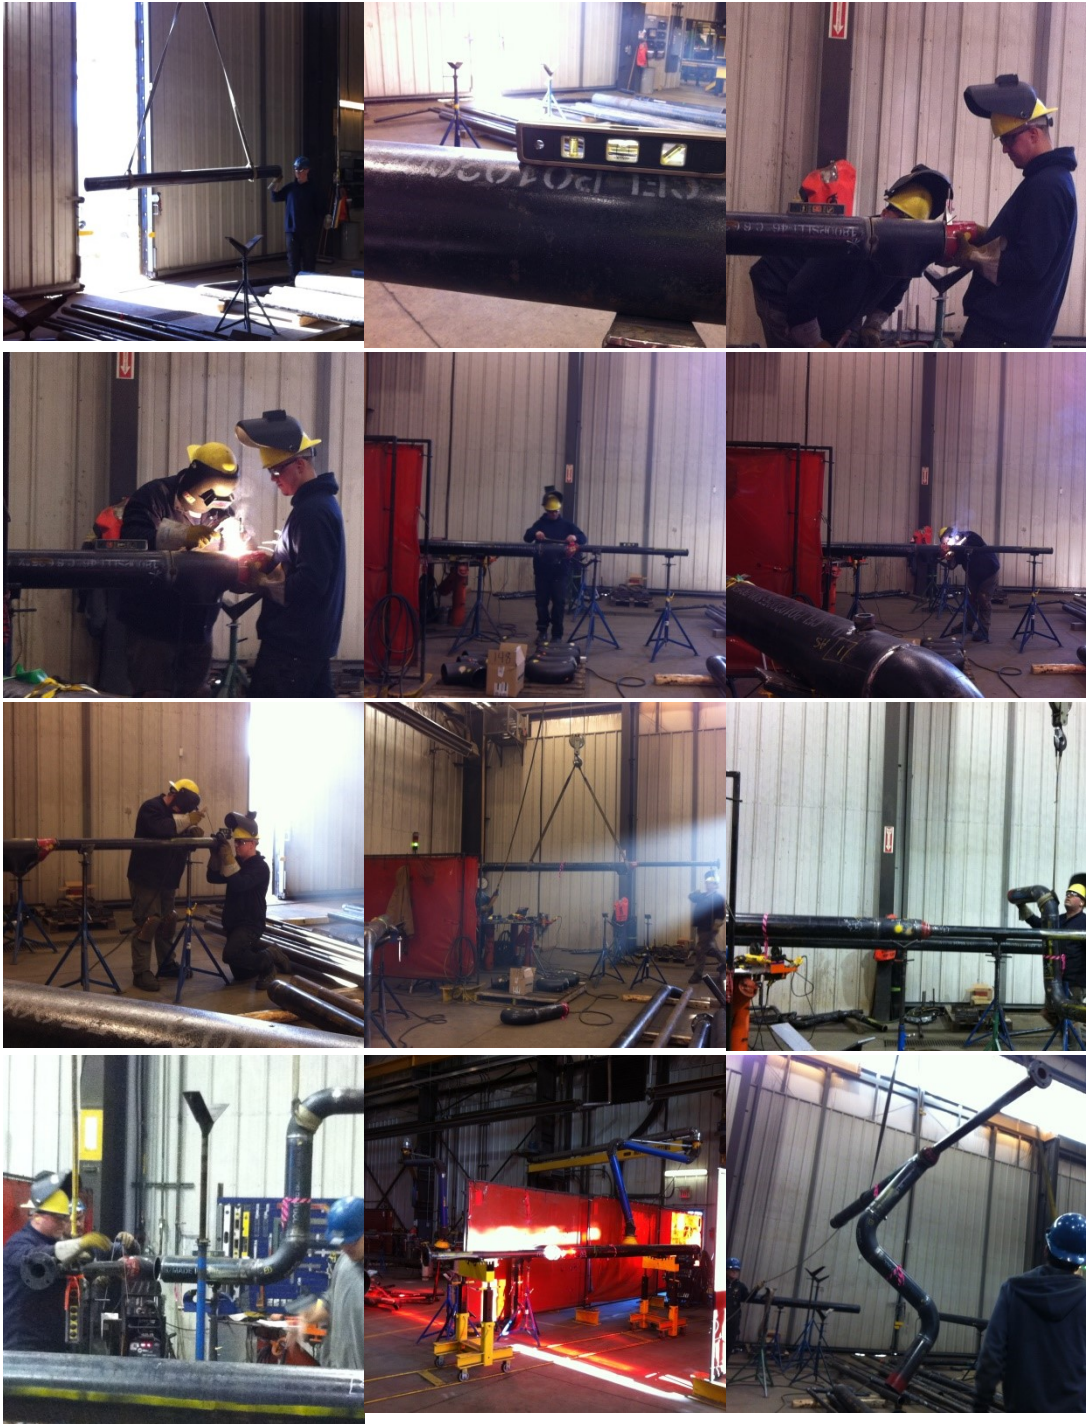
Fabrication process of sub assembly 12 and the final pipe spool
